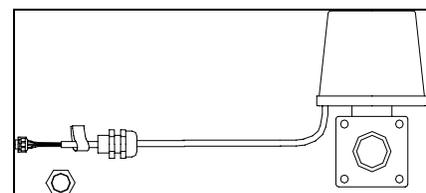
Boom Control Valve with 1.5 or 5m cable
